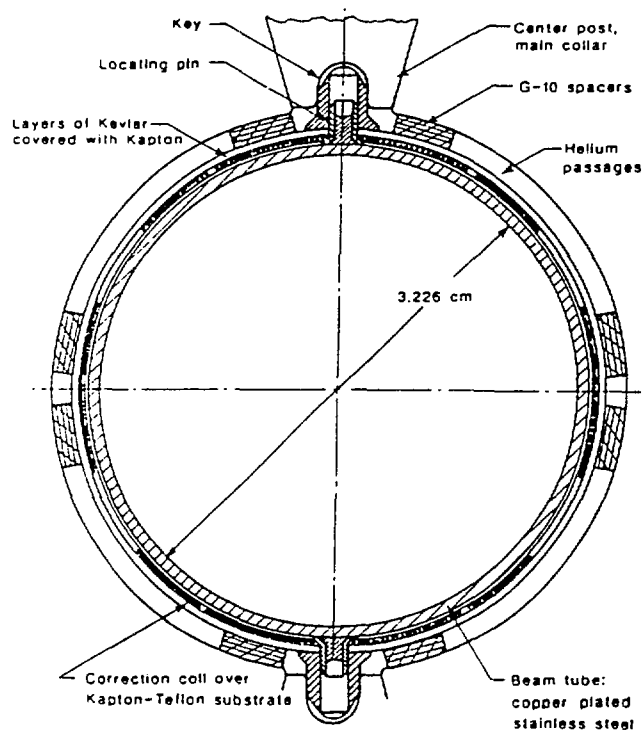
Cross section of bore tube assembly, including beam tube (high vacuum chamber), superconducting correction coil winding, and spacers bearing against the inner surface of the main dipole. Note also keys and pins for locating the winding in the dipole.
